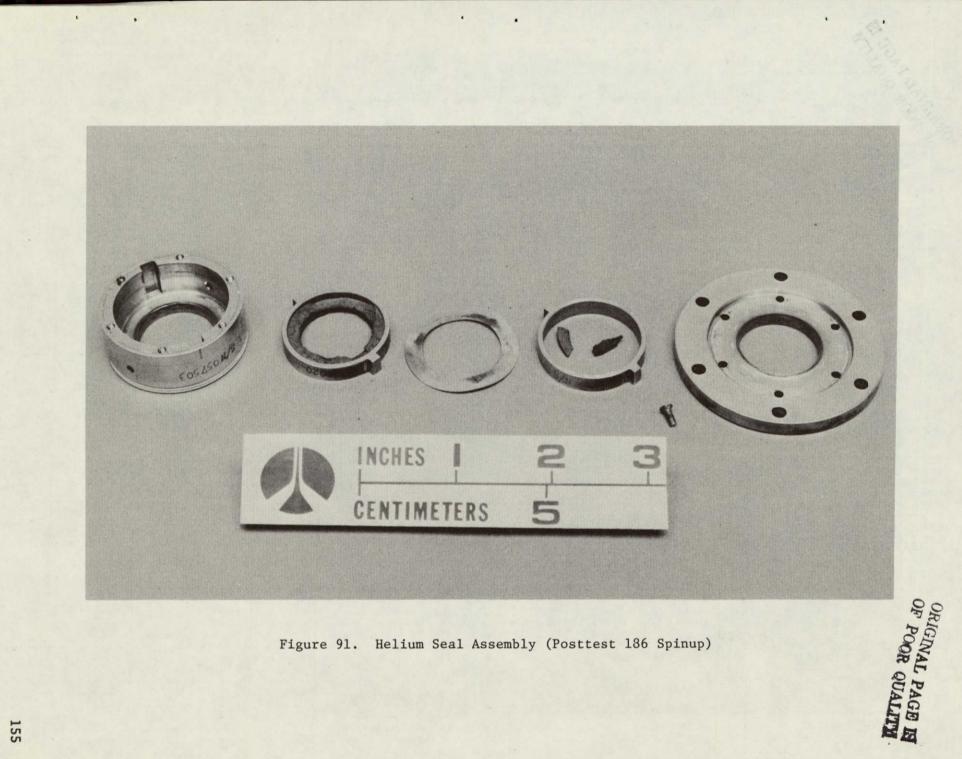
Helium Seal Assembly (Posttest 186 Spinup)
